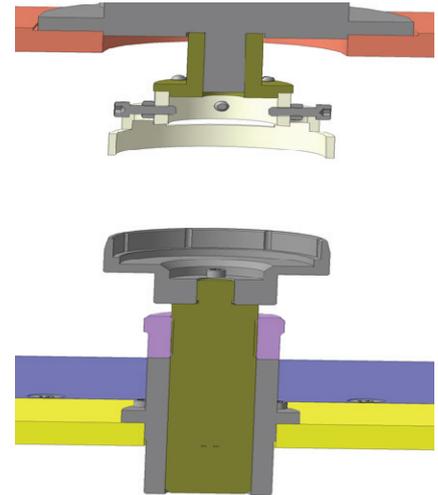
3D view of the model of the rotation unit with mandrels for workpieces of the technological complex for friction welding
